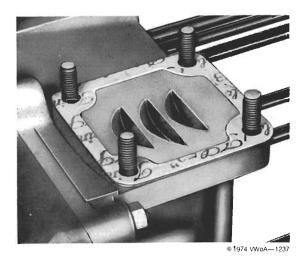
Oil deflector plate and gasket properly installed. The upper face of the deflector plate is marked top.
